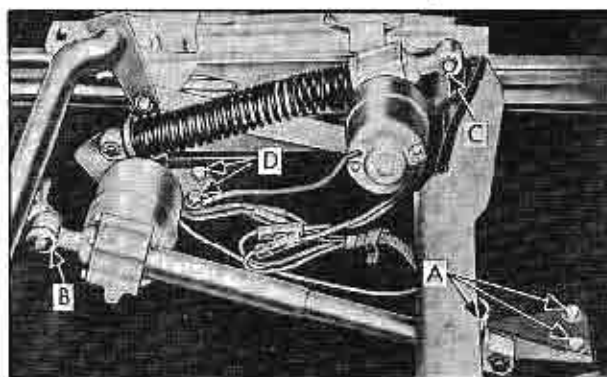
Horizontal Electric Regulator Removal (Coupes)
